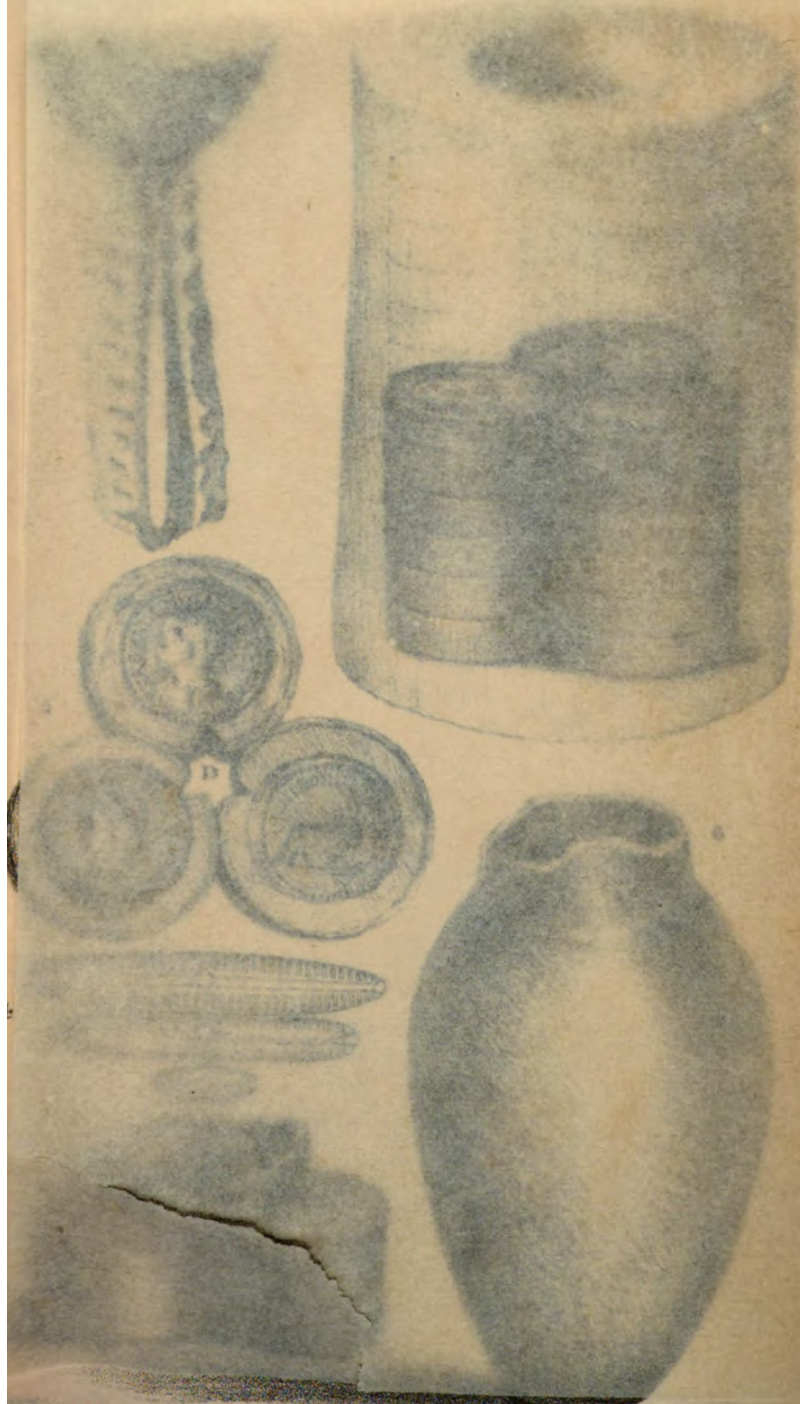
Mould arranged for casting. 2. Mass of metal filling channel D. 3. Castings.
